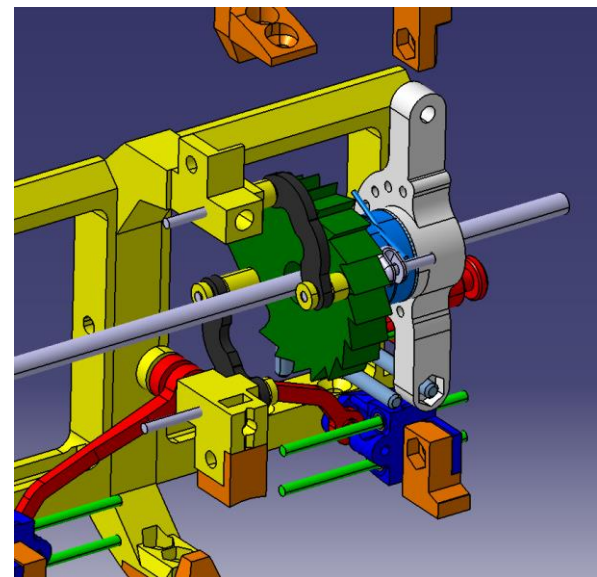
Detailed view on deployment driving components like torsion spring (light blue), cranked shaft (dark green) and smaller piston rods (black) right in the middle of deployment (approx. 60% deployed)
